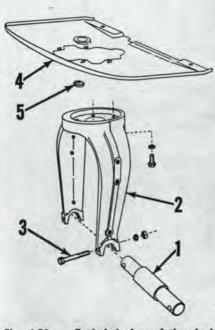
Exploded view of the single front wheel fork and associated parts.
